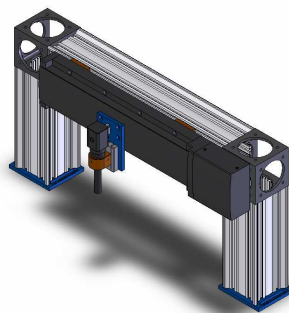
Detail of the 3D CAD design view of machine-vision sub-assembly.
